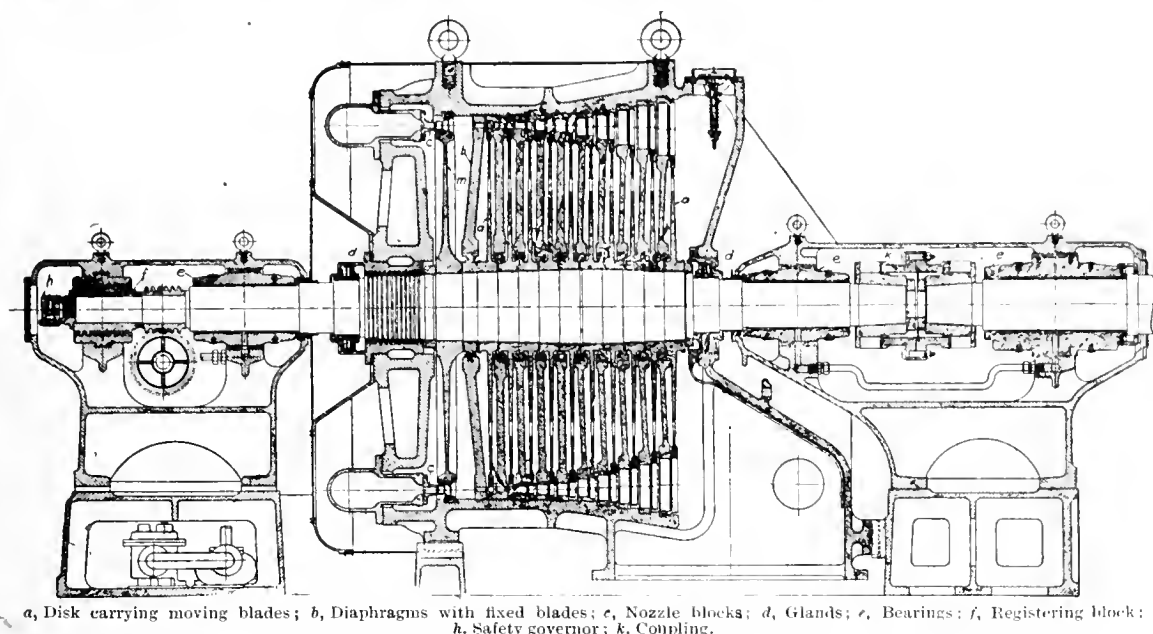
LONGITUDINAL SECTION THROUGH WESTINGHOUSE-RATEAU H.P. IMPULSE TURBINE.
